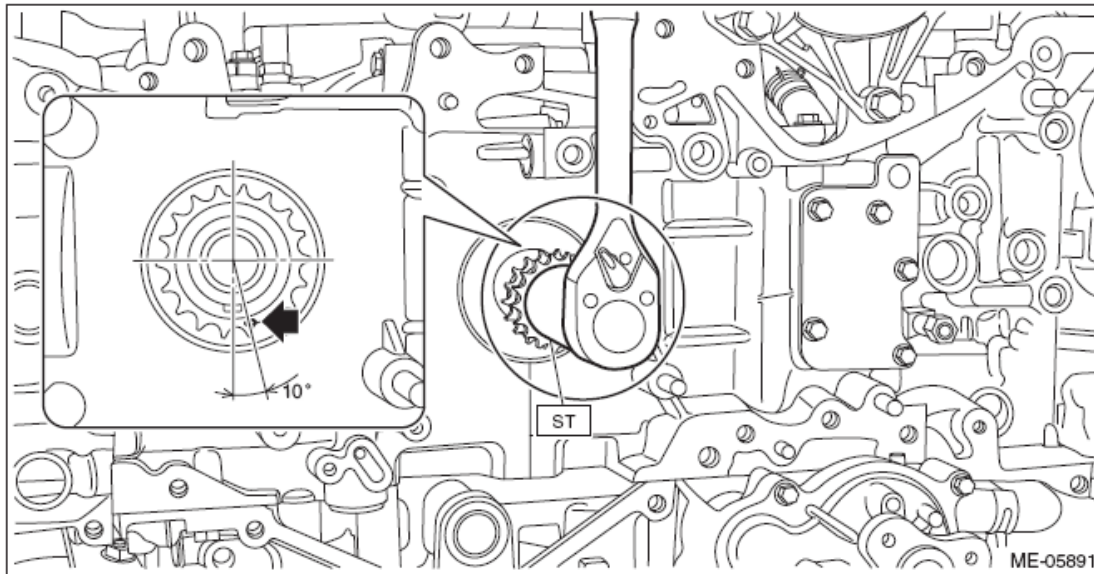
Turning Crankshaft To Align Crank Sprocket Alignment Mark
